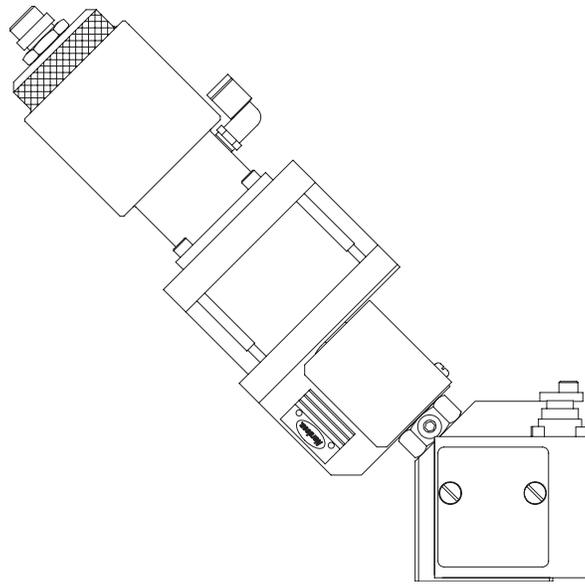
Typical CE20 Gun (CE Approved Gun Shown)
